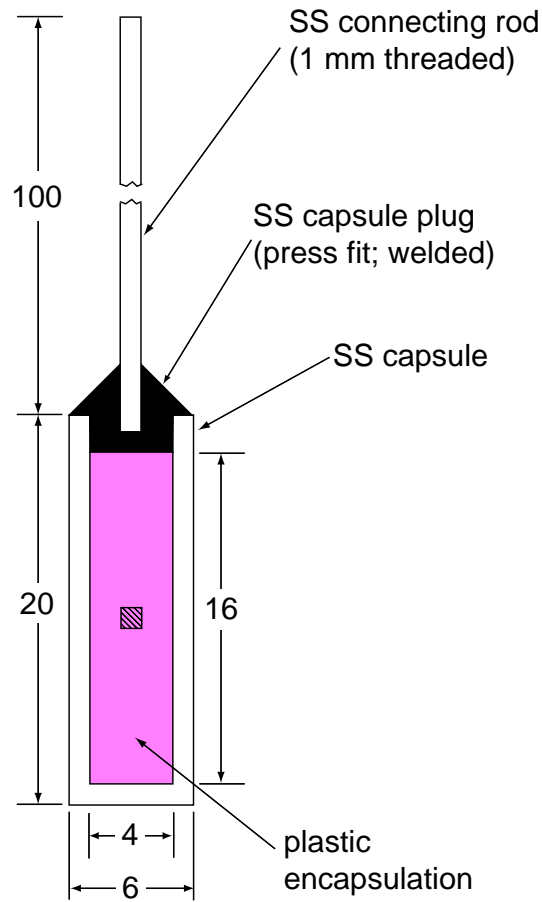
Cutaway view of source capsule. Dimension units are mm.
